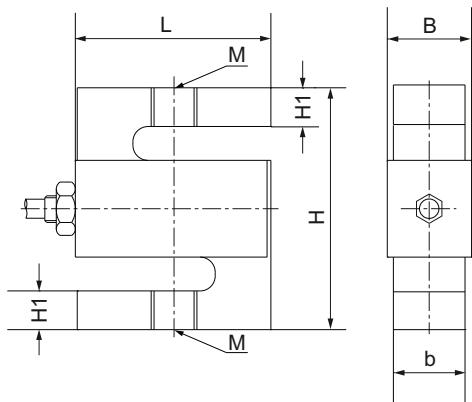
SIWAREX WL250 ST-S SA dimension drawing
